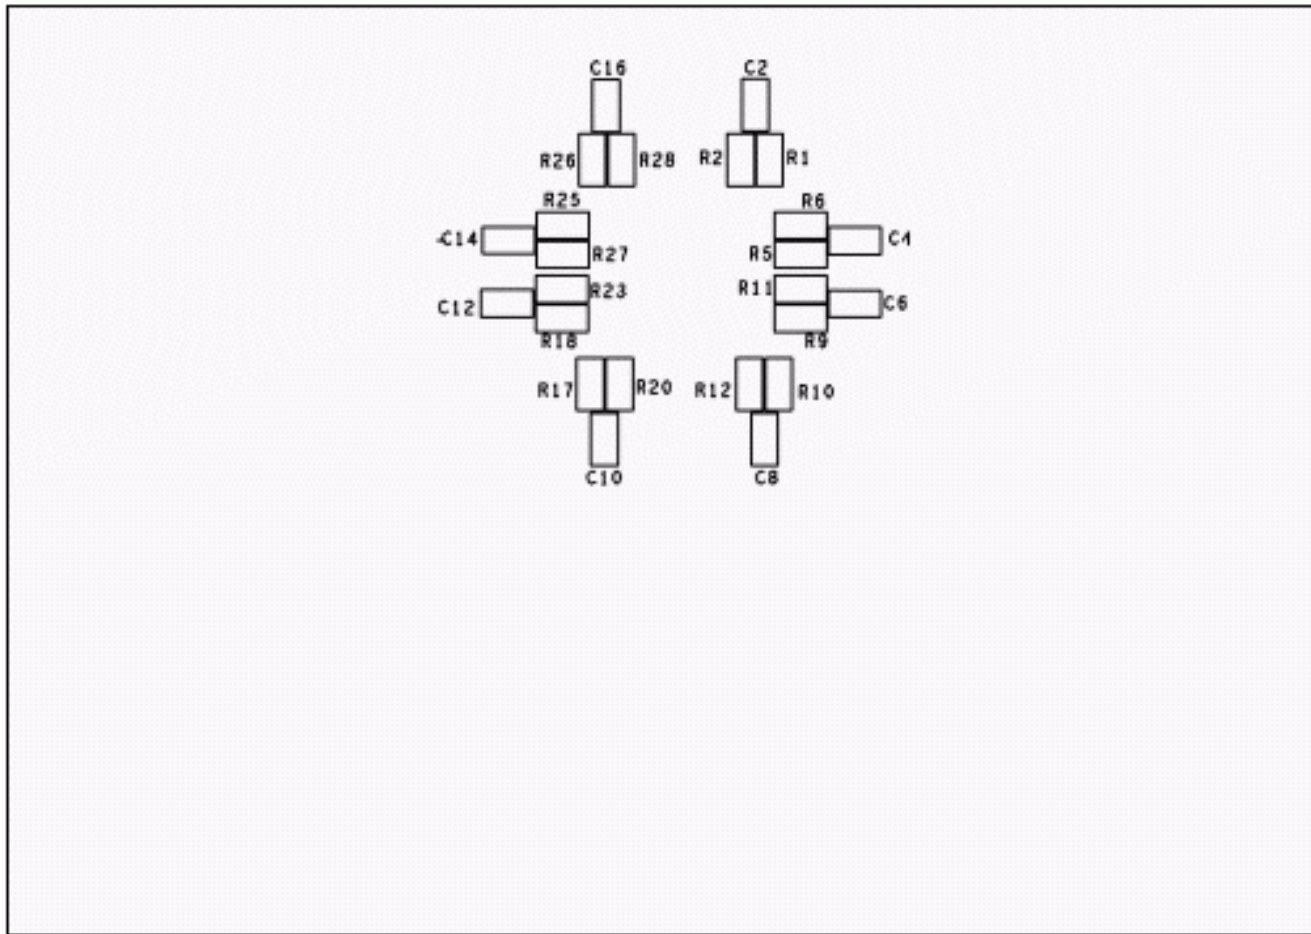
E1x8 75 Ω impedance -- Silkscreen bottom layer layout (view mirrored)
